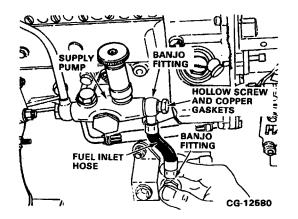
Install Fuel Inlet Tube (Fuel Filter to Supply Pump) (Current Production)
